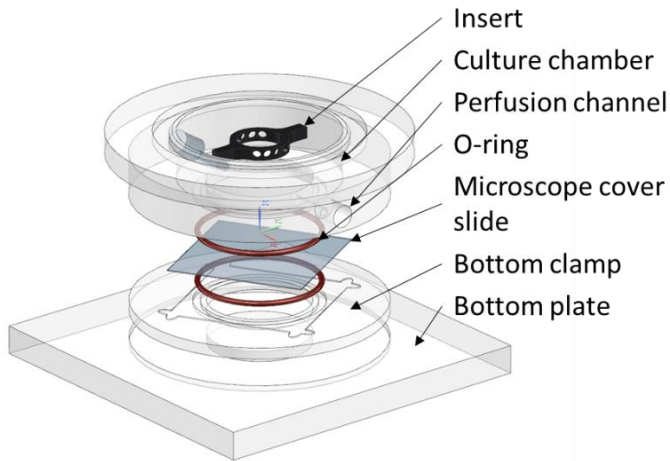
Bioreactor design in exploded view with components from top to bottom: insert, chamber, o-ring, microscope cover slide, o-ring, bottom clamp, bottom plate
